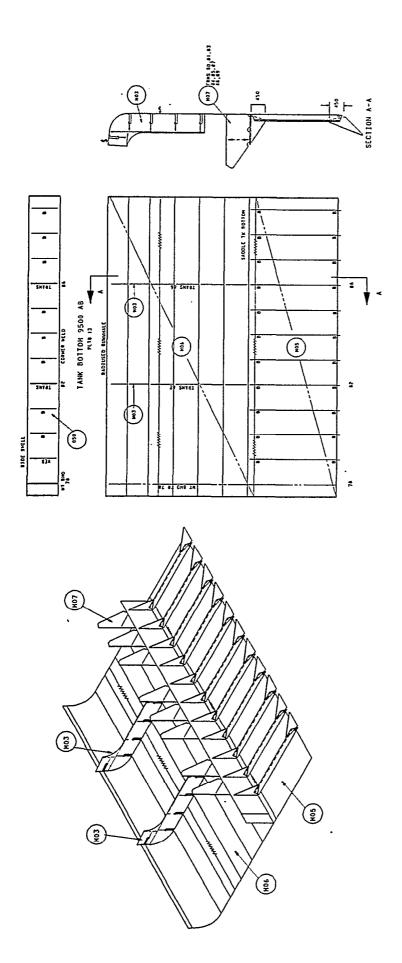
EXAMPLES OF WORKSTATION DRAWINGS
